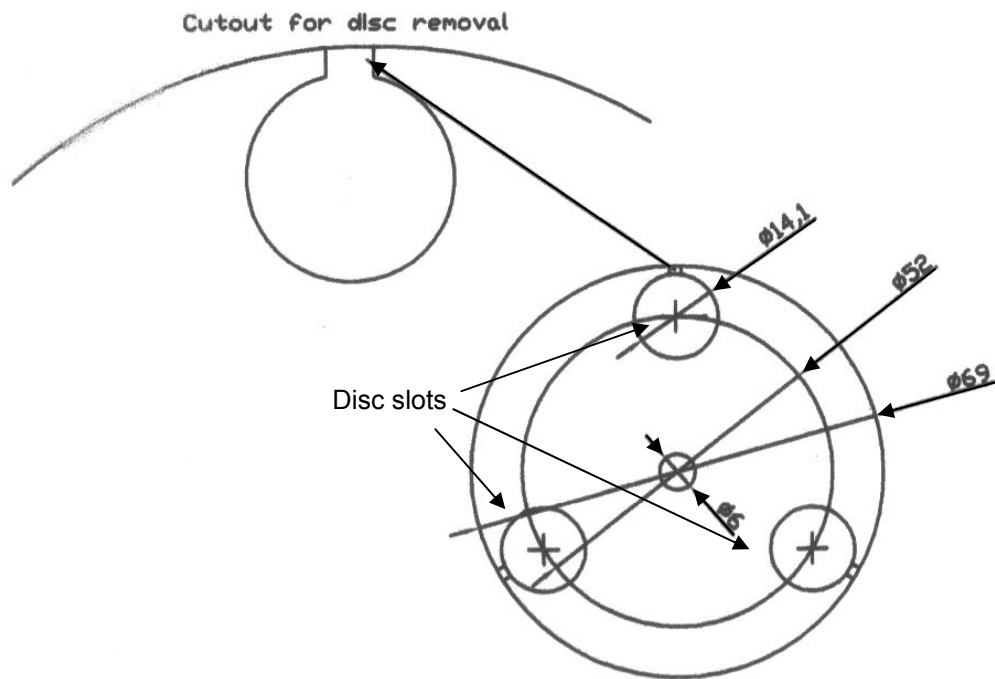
Lower jig – 3 disc holder top view with detail for disc removal cut-out.
